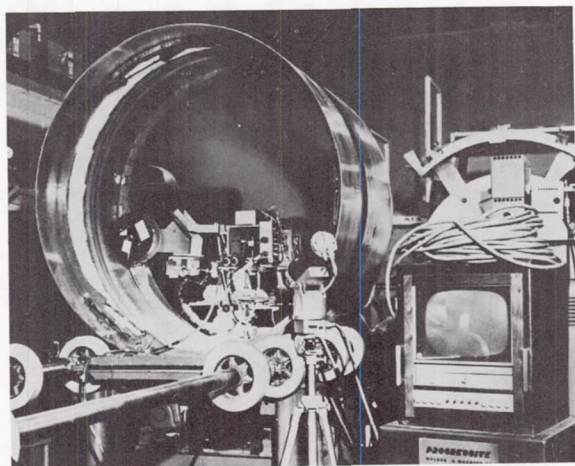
Weld seam tracker and proximity control.
